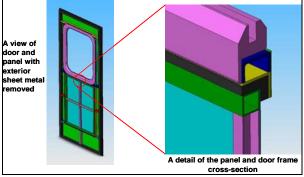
A three-dimensional model of a panel that supports impact loads through bearing
